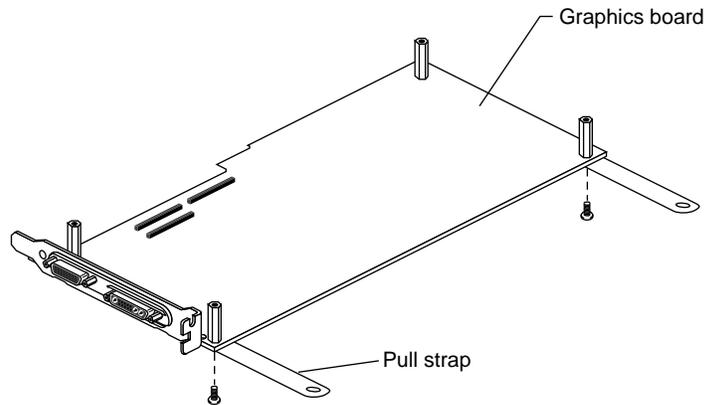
Inserting the Screws and Attaching the Standoffs
